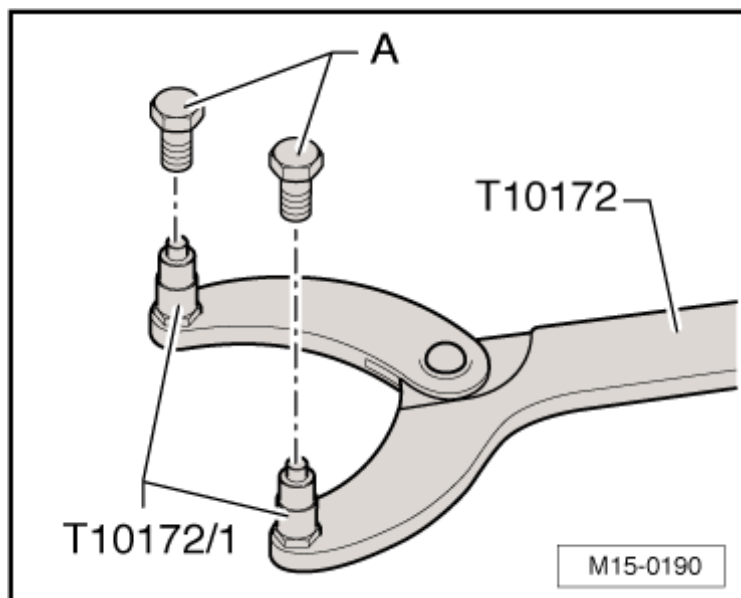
Identifying Bolts Attached To Adapter T10172/1 For Installation
